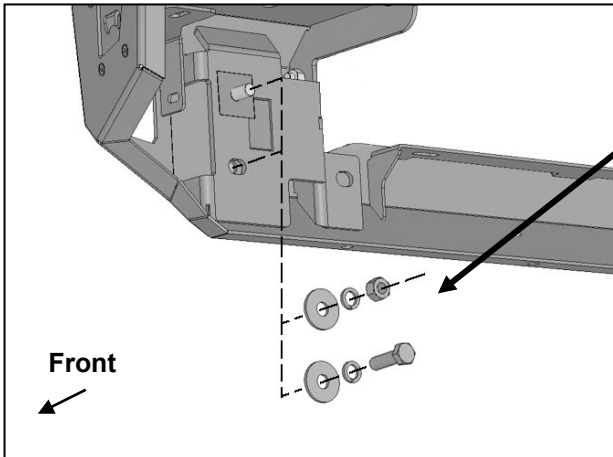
Insert the 12mm Bolt/Nut Plate into opening in back of Bumper bracket. Push Bolt out through outer top mounting hole.
